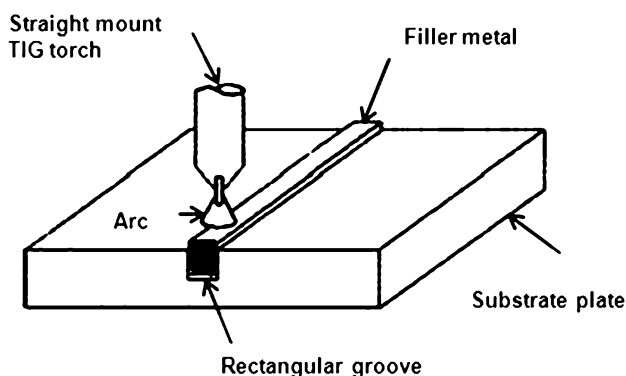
Welding with filler metal preplaced in rectangular groove of the substrate metal
